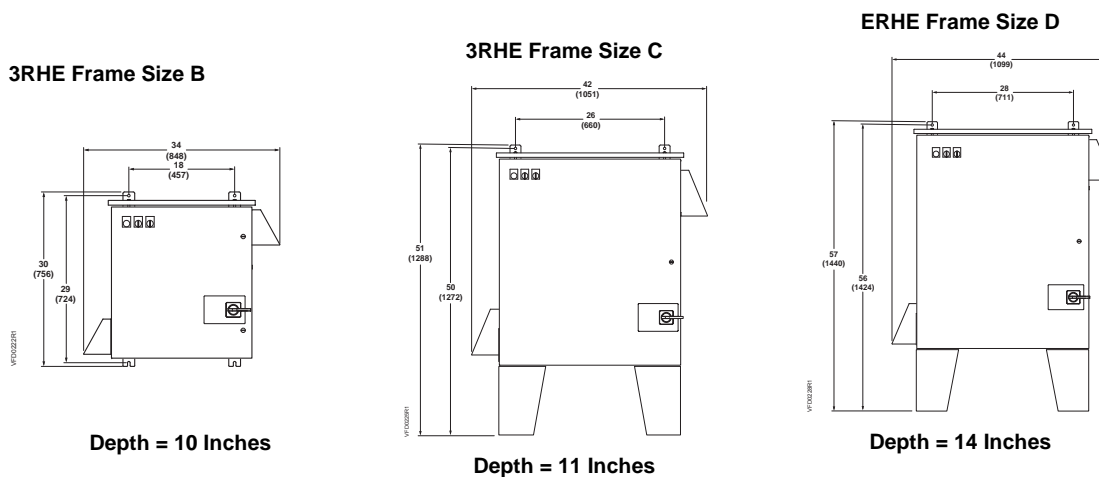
NEMA 3RHE Enclosure Dimensions in Inches (Millimeters).
